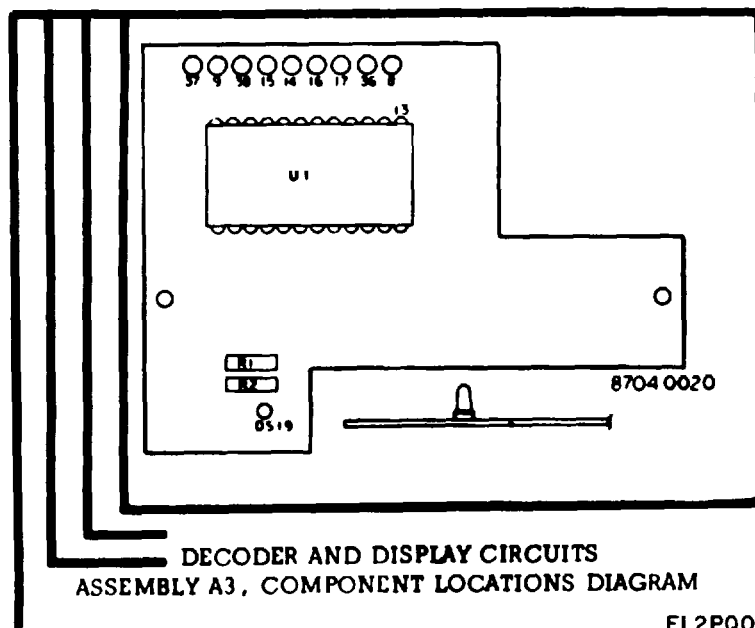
Decoder and Display Circuits Assembly A3, Component Locations Diagram.
